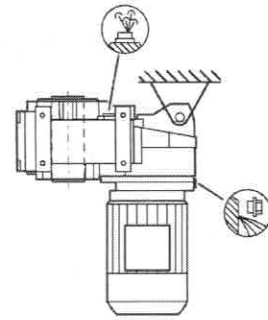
Mounting positions for helical gearbox DF/ZF flange-mounted design, sizes 49 - 189 and DZ/ZZ with housing flange, sizes 49 - 129
